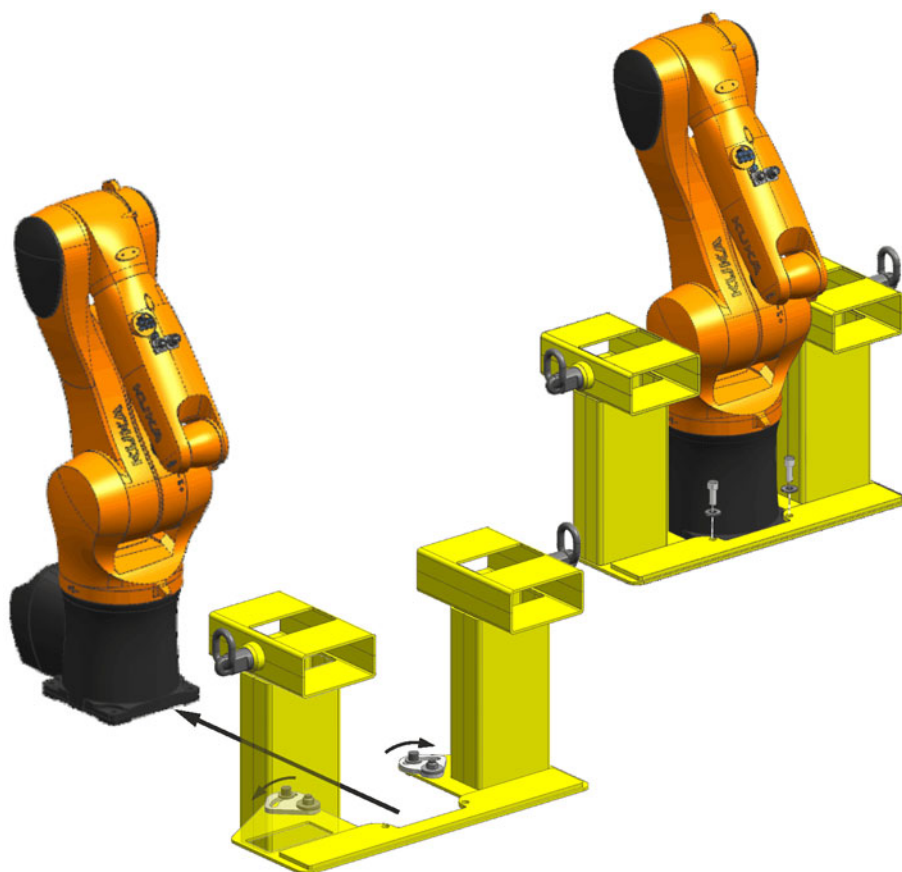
Fastening the base frame of the Load Lifting Attachment (front of robot)
